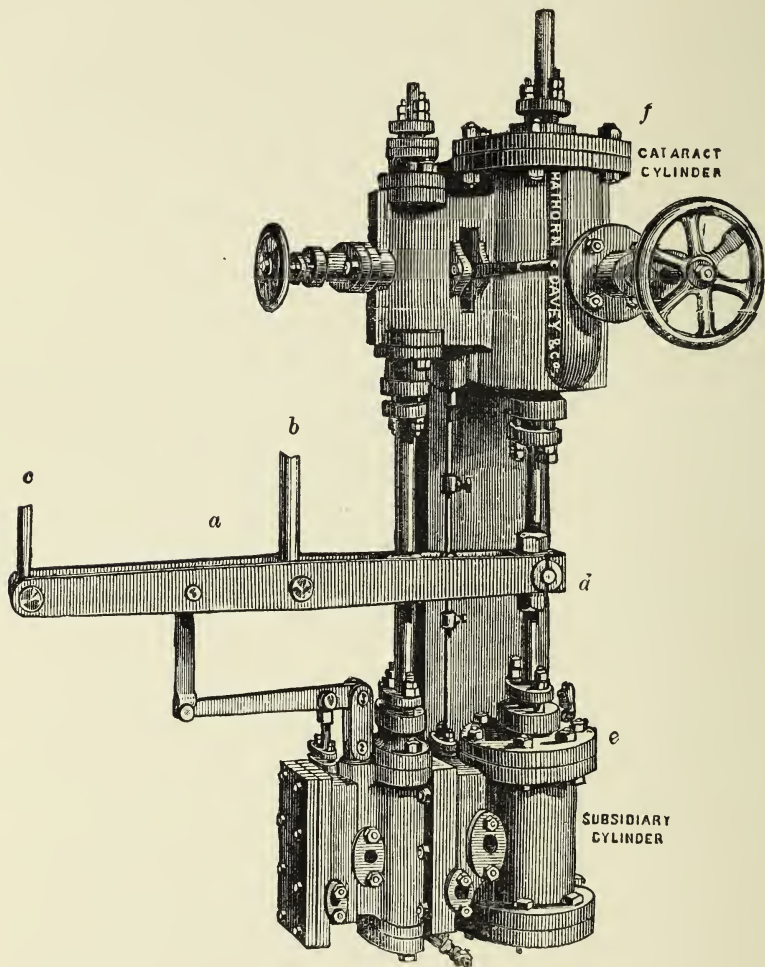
DAVEY'S DIFFERENTIAL VALVE GEAR AS APPLIED TO WORK THE CORNISH ENGINE.
